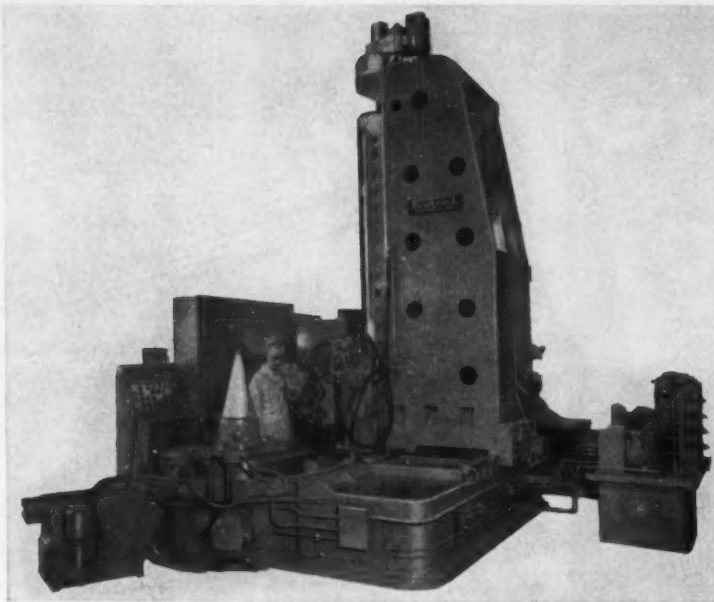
Barnesdril numerically controlled drilling machine with vertical travel, two-spindle combination drilling and tapping head
